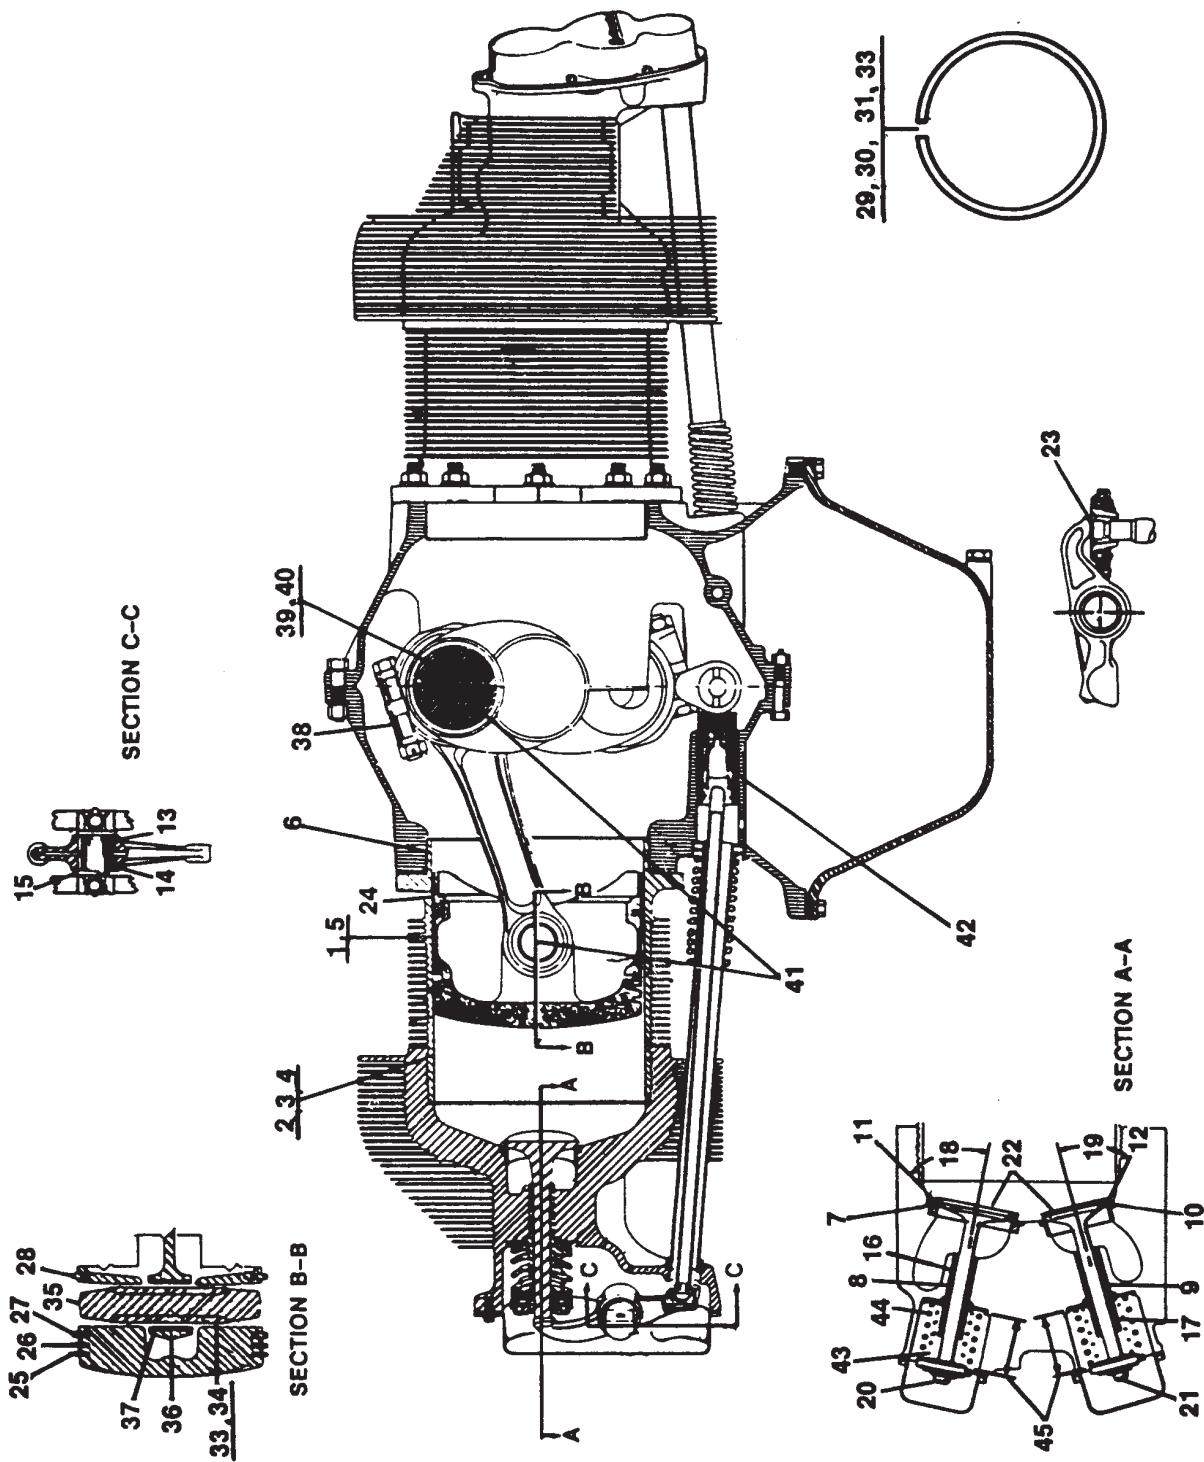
IO-550-G, N, P & R Cylinder Assembly Service Limits
